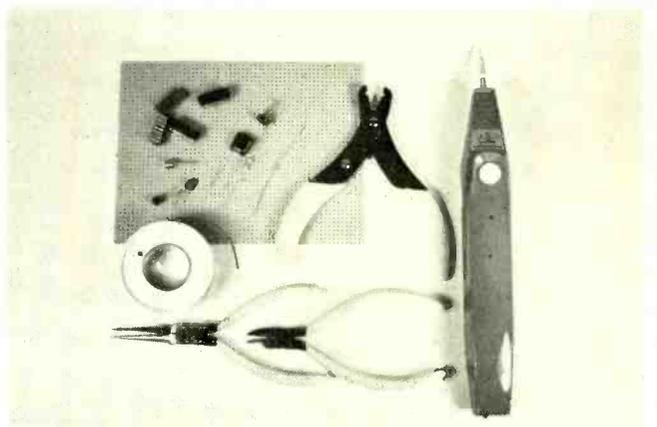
TOOLS AND MATERIALS required for the cut/strip/hook wiring method.
